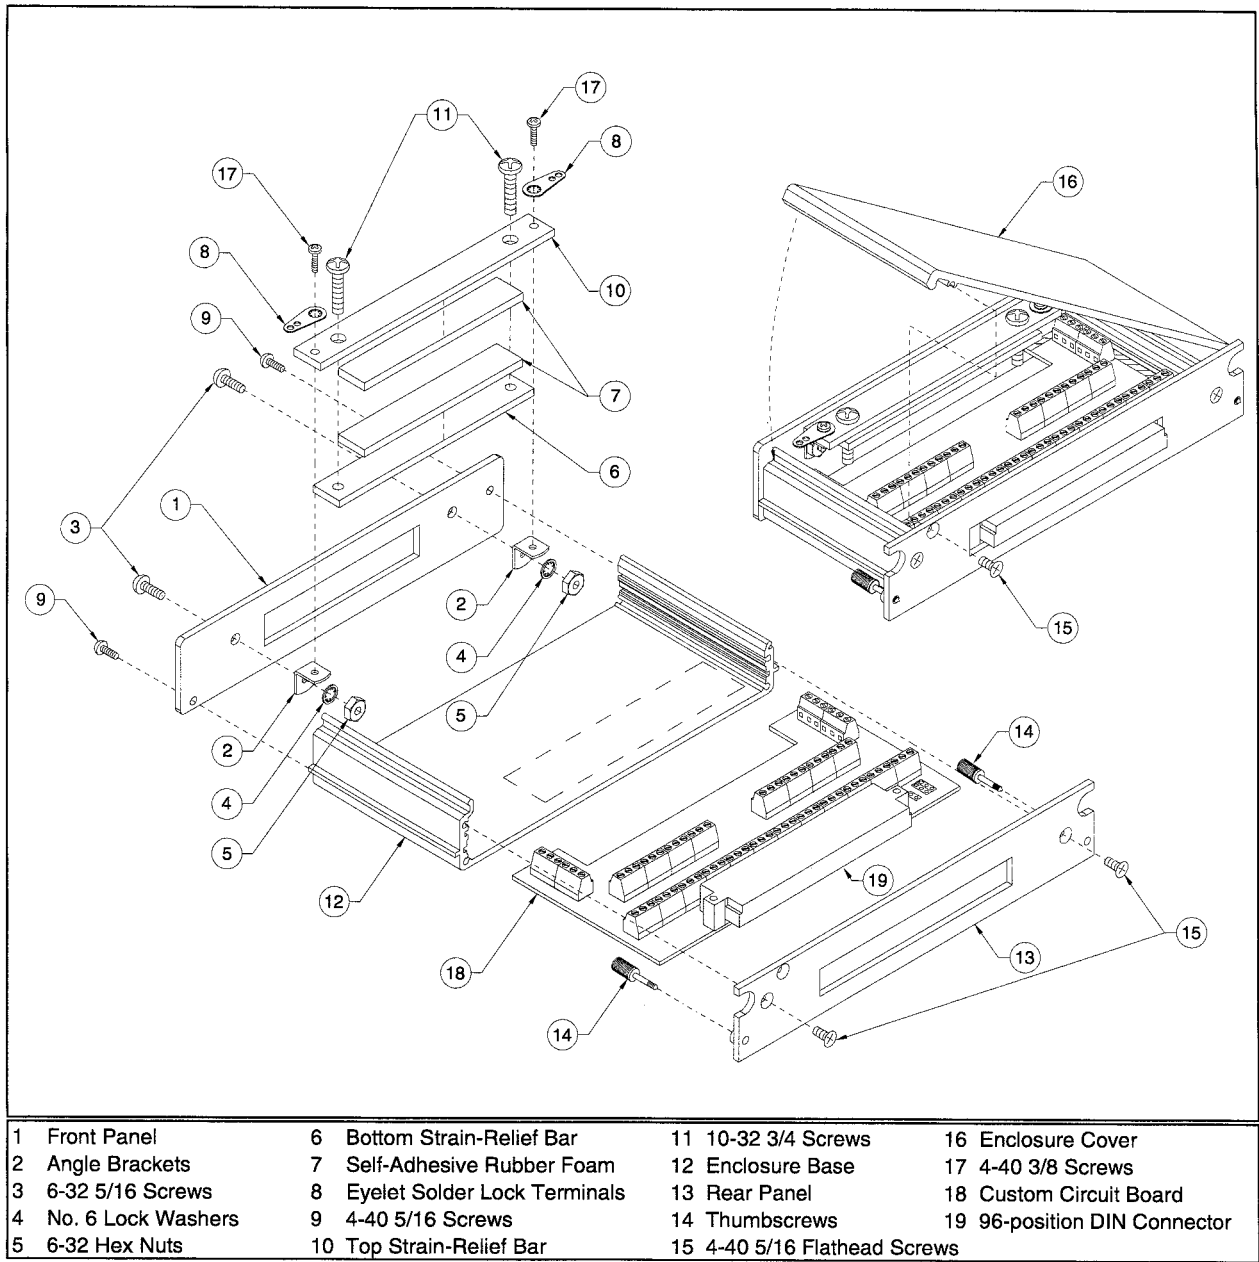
SCXI-1381K Custom Terminal Block Parts Locator Diagram
